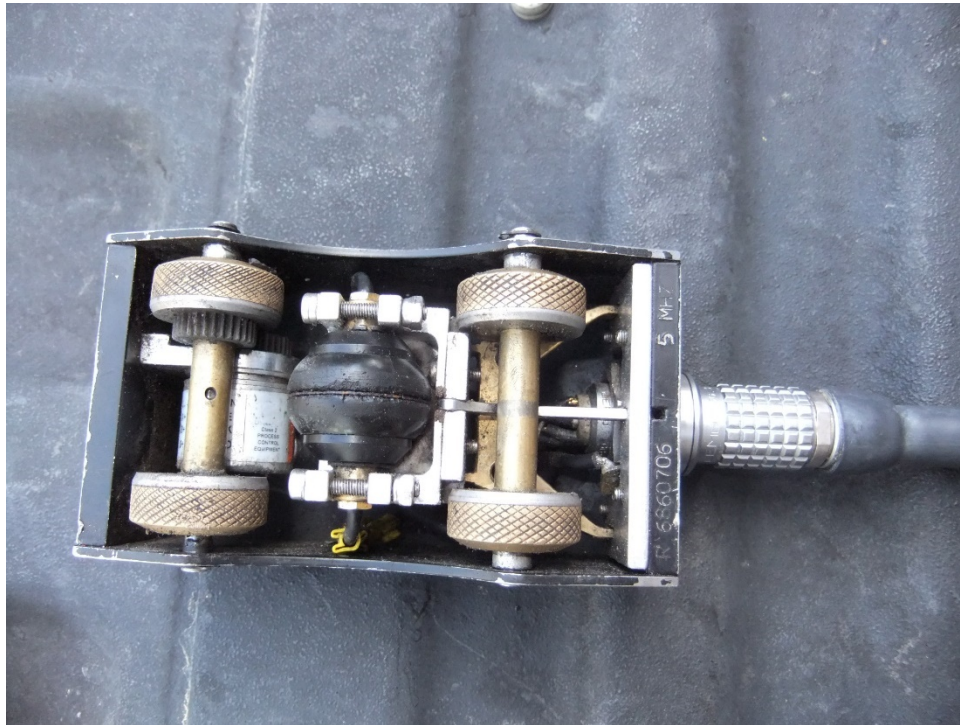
Bottom view of "Pocket-UT" transducer assembly with liquid filled track-ball and encoder
